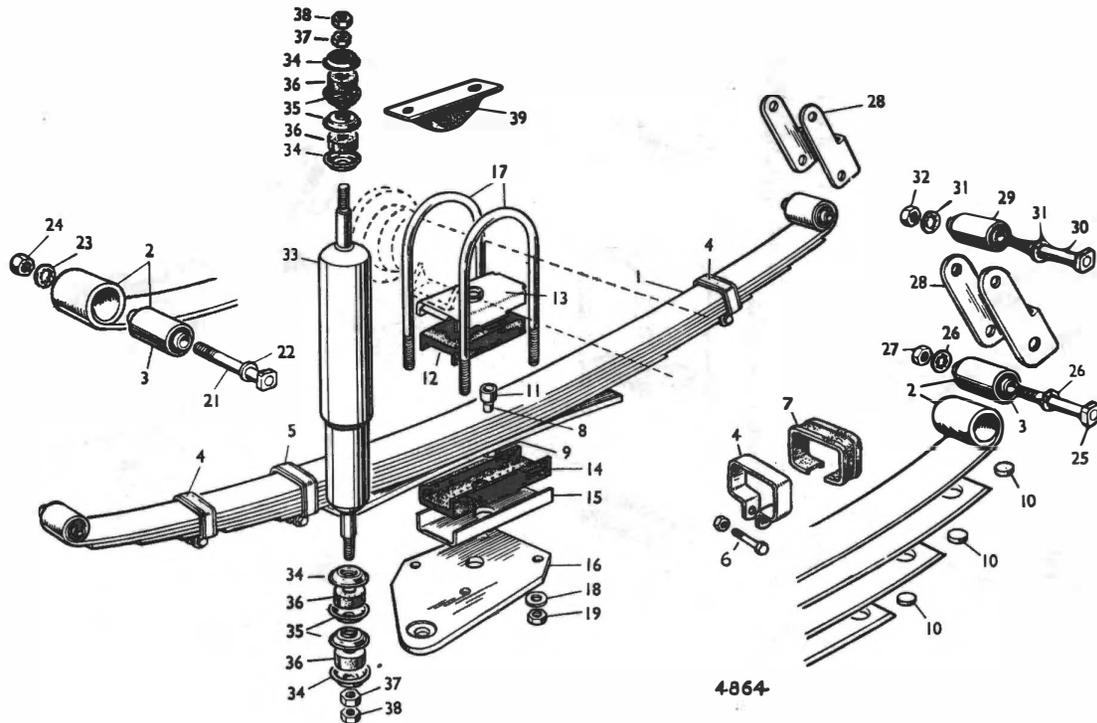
Exploded view of Rapier rear suspension (without eccentric bush)
